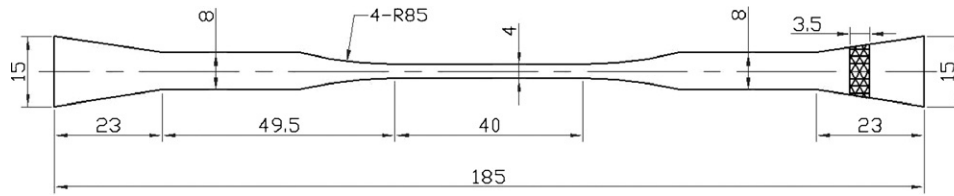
Drawing of the as-received C/C specimen (all dimensions in mm).
